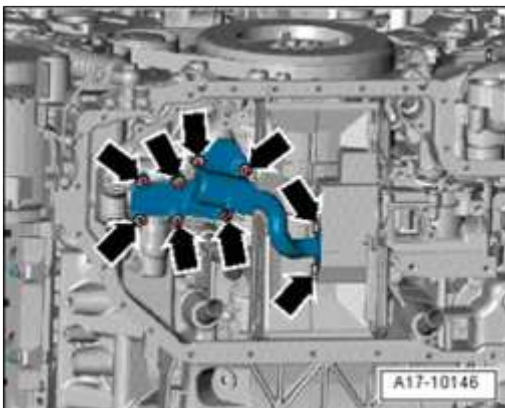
Removing Oil Pipe Together With Oil Check Valve Housing
